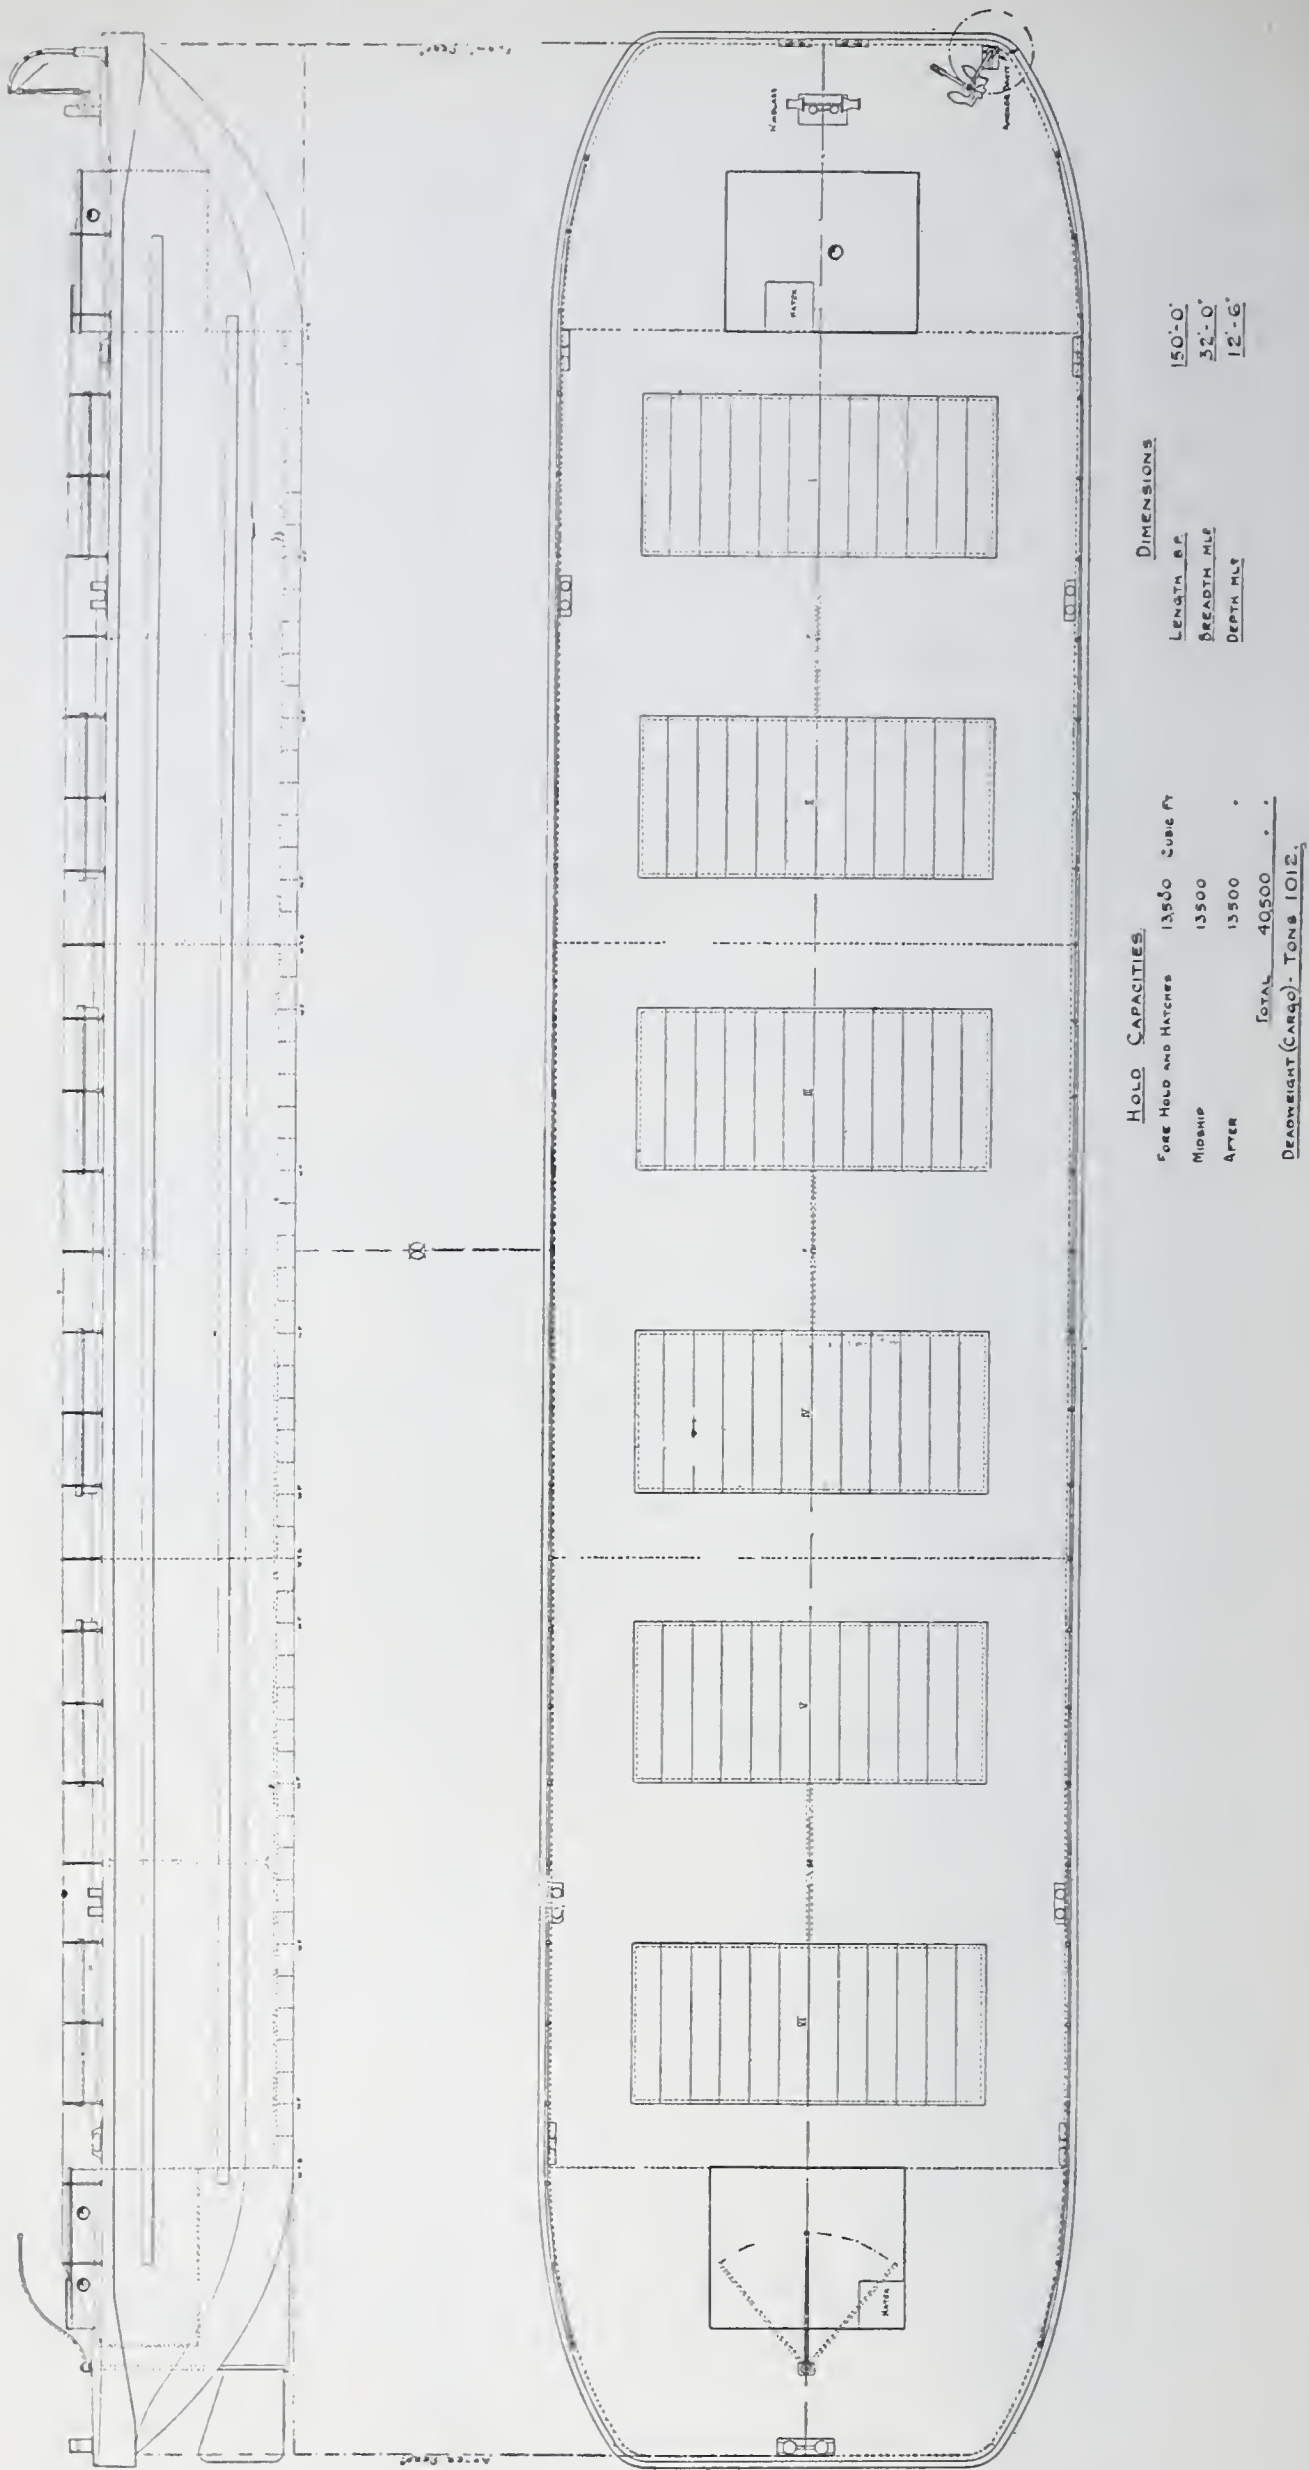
General Arrangement of 150-Foot Steel River Barge.
